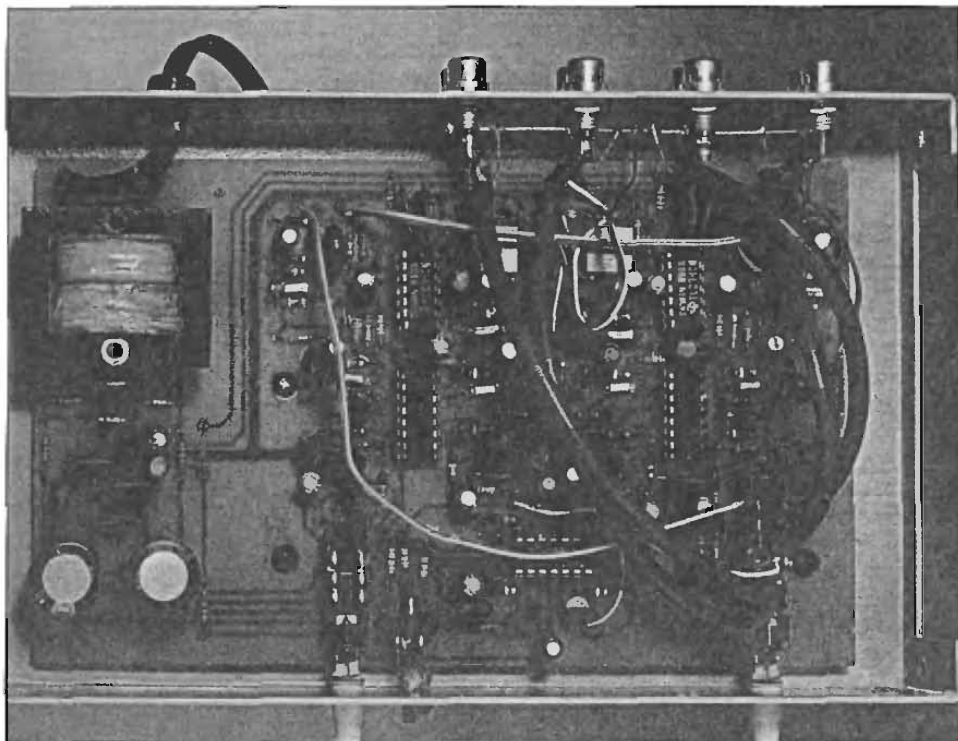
Interior of P-522 noise-reduction unit, showing parts layout
